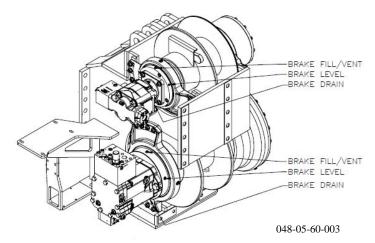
Hook Winch & Boom Winch Brake Oil Change Ports
